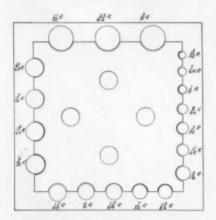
F. Radius die for trimming radii in sizes from 3/32-in. to 3/8-in.
